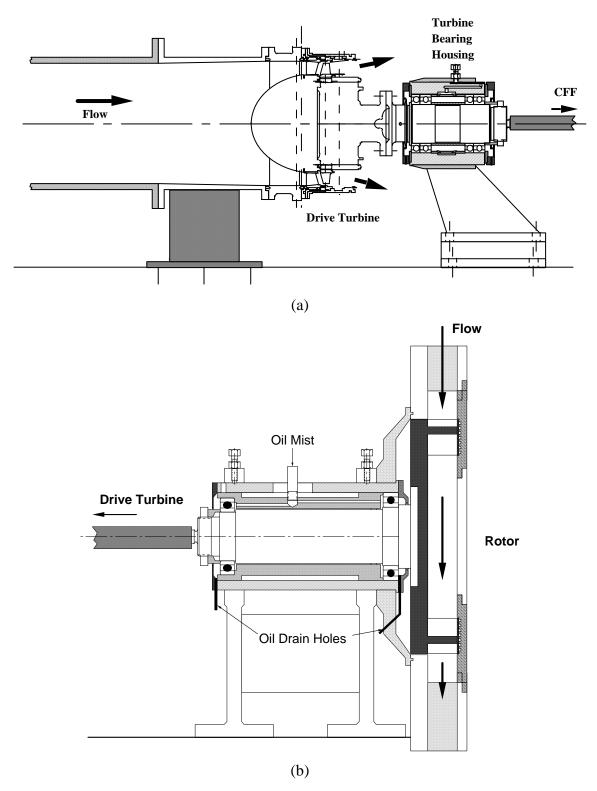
Schematic of Turbine Test Rig (a) and Crossflow Fan Test Assembly (b)
